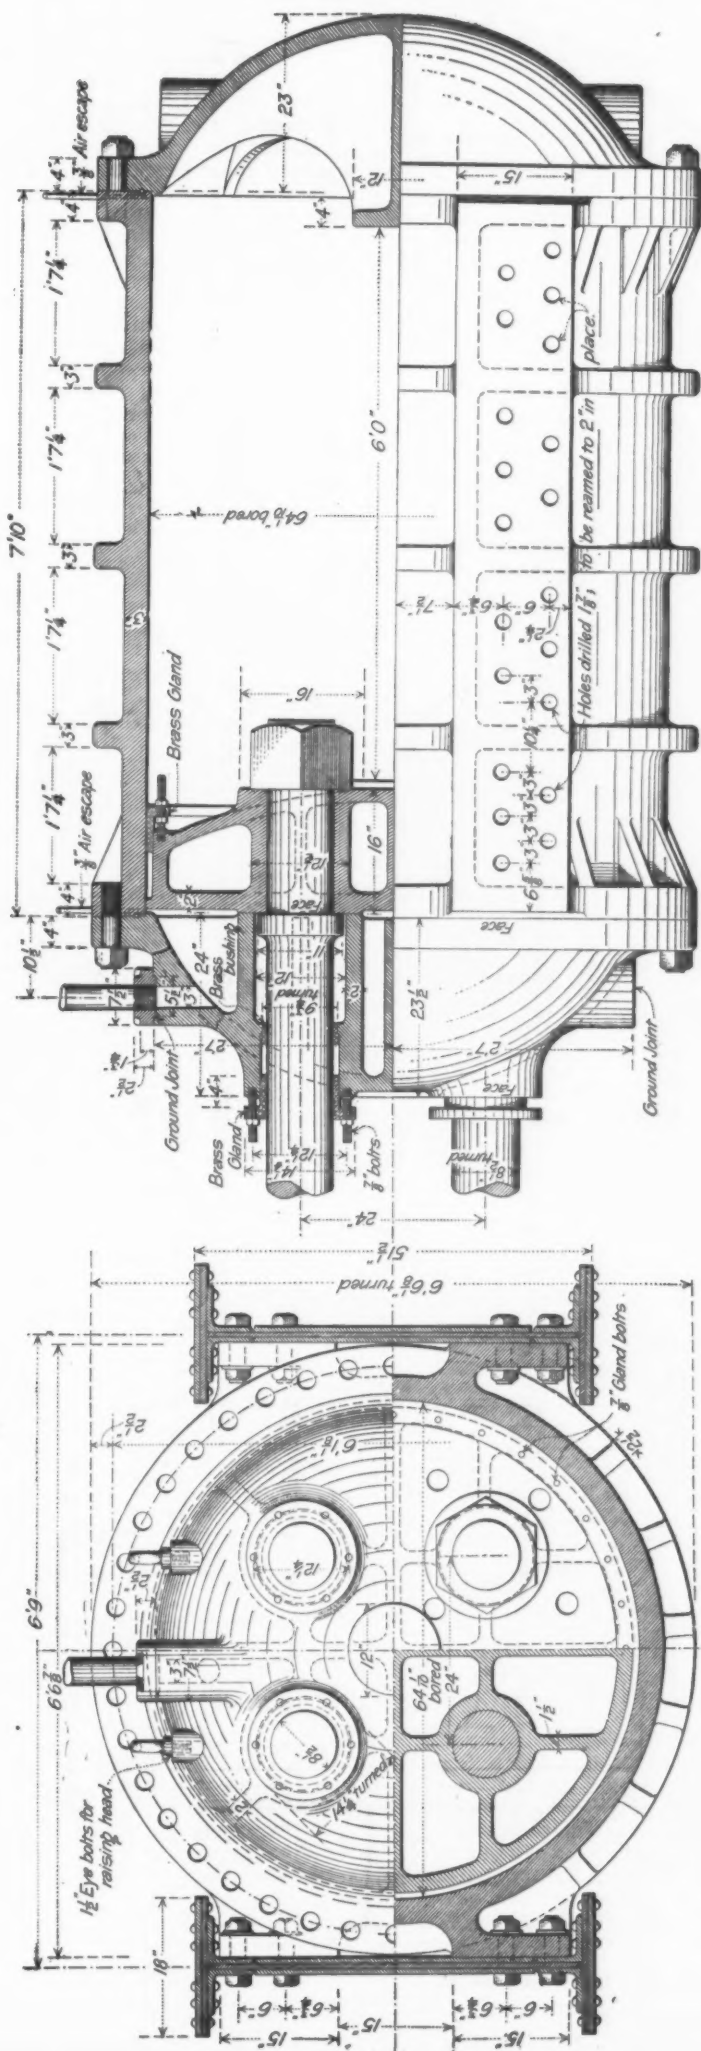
Part End Elevation, Section through Cylinder and Section through Piston.
